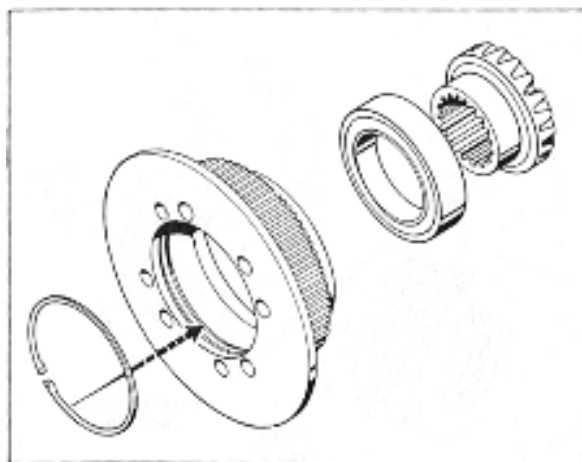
Forward Clutch Flange, Roller Bearing and Bevel Gear (snap ring in HP clutches only; location arrow applies only to clutch no. 1-00100-2419 and 1-00100-2420).
